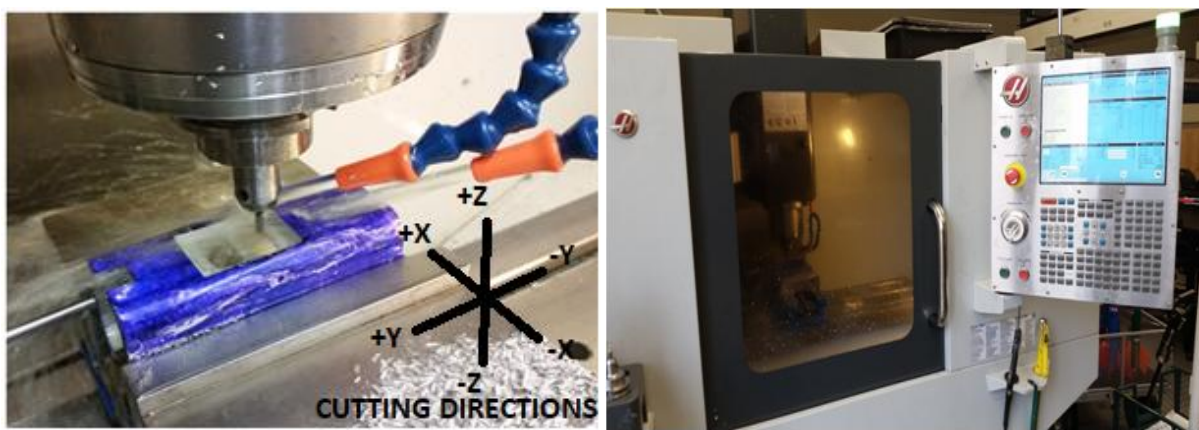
ODU15X15 Balance Being Cut on CNC Machine
